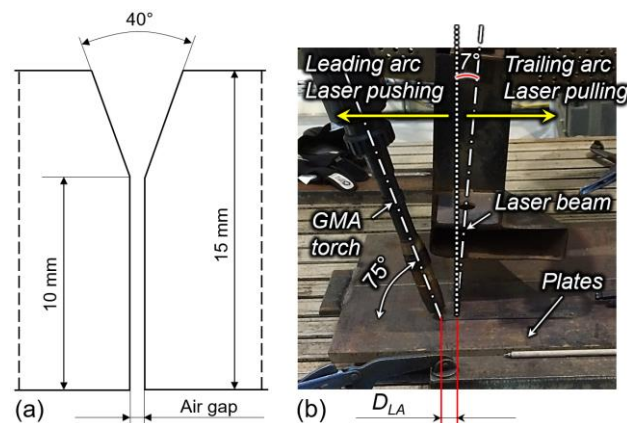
(a) Y-bevelling geometry and (b) welding setup.
